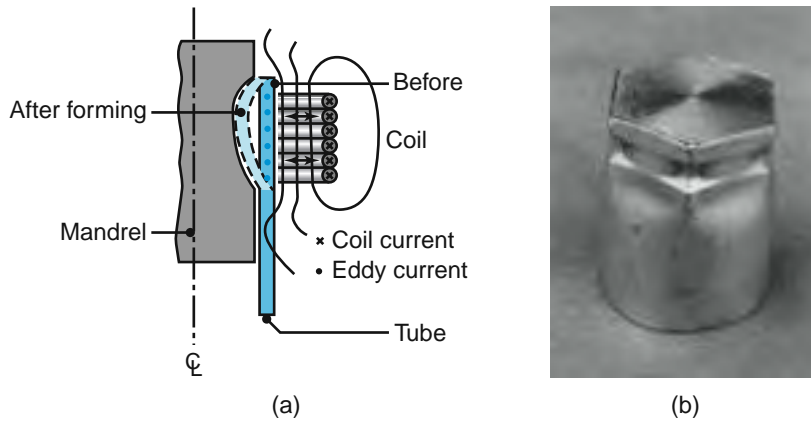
(a) Schematic illustration of the magnetic-pulse-forming process used to form a tube over a plug. (b) Aluminum tube collapsed over a hexagonal plug by the magnetic-pulse-forming process.
